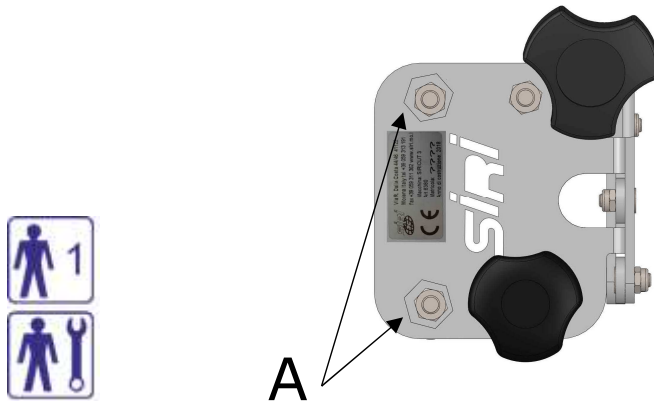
Adjusting screw between guide and Siricut.
